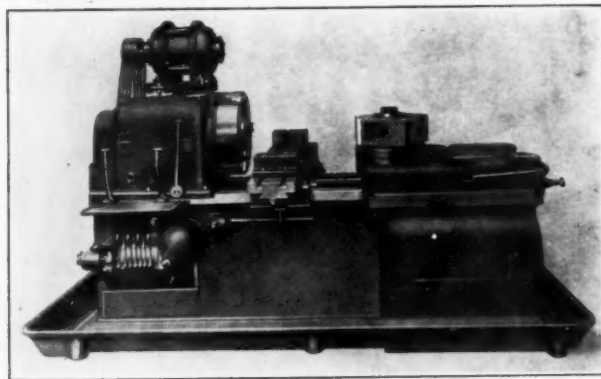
AUTOMATIC CHUCKING MACHINE, MODEL 5D
